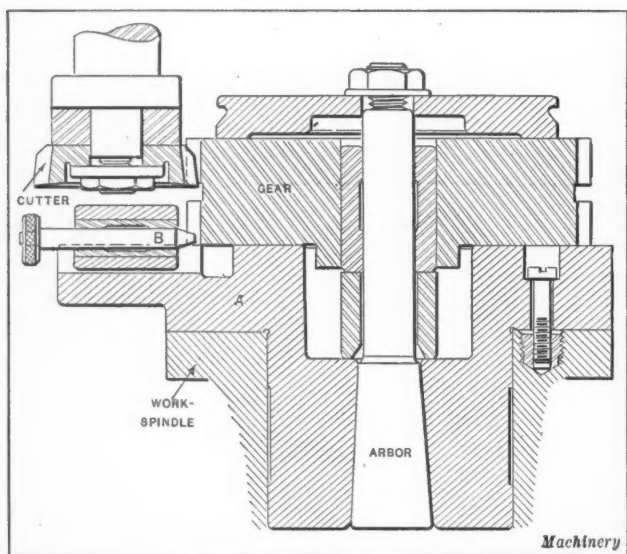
Locating Fixture Similar to Type shown in Fig. 17
